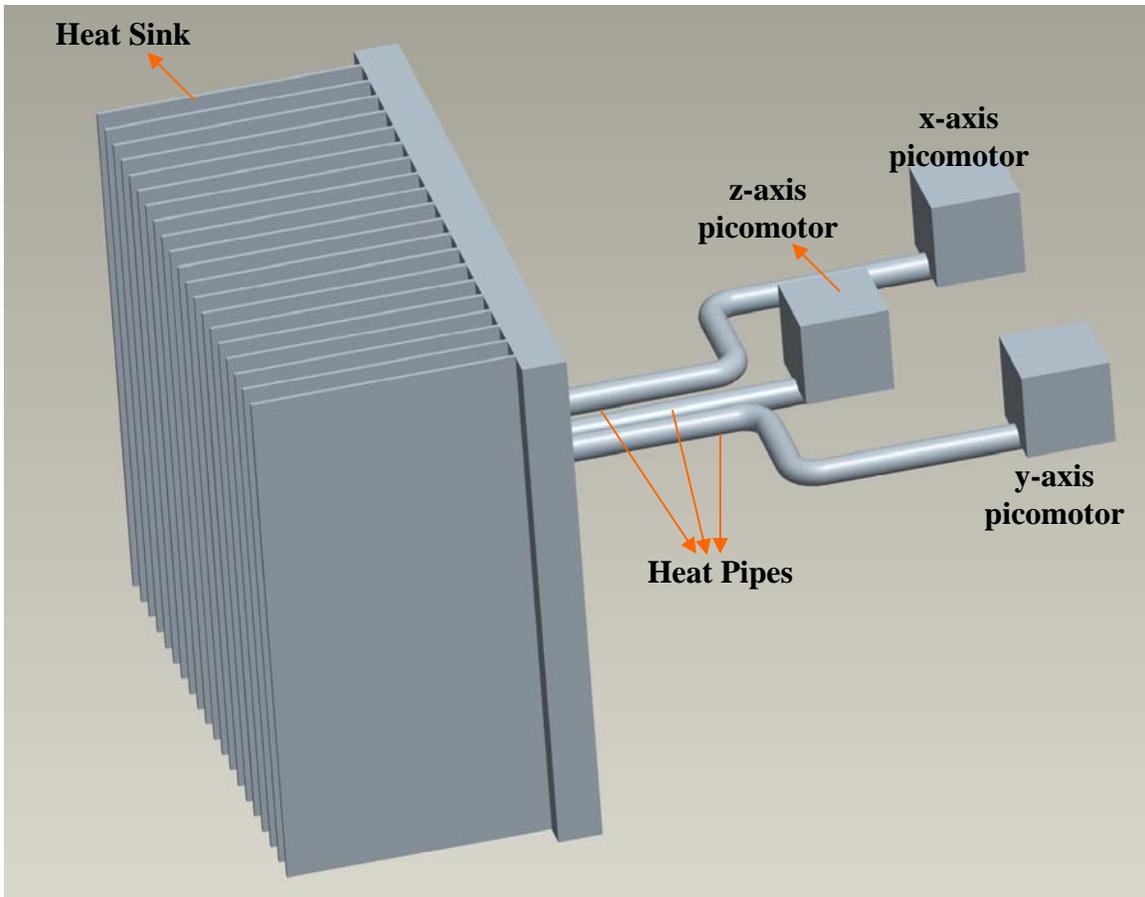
CAD drawing of the picomotors, heat pipes and heat sink carried out on SolidWORKS
